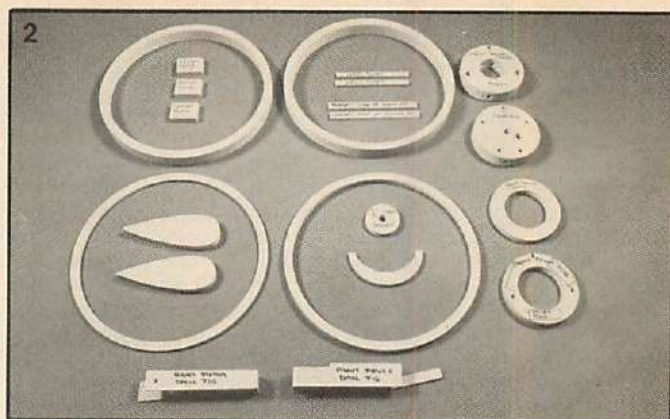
019 red pressboard material rolls into cylinder to form duct. It's tough, yet flexible. Photo 2: Accurately machined plywood formers, no sign of edge chipping. Note the drill jig in foreground. Photo 3: Injection molded rotor is a little over 5" dia. Spin tests reached 30,000 rpm. Normal range will approach 20,000 rpm. Photo 4: molded pieces supplied; glass filled nylon engine mount, fixed position styrene staters, polyethylene fuel cell included.
